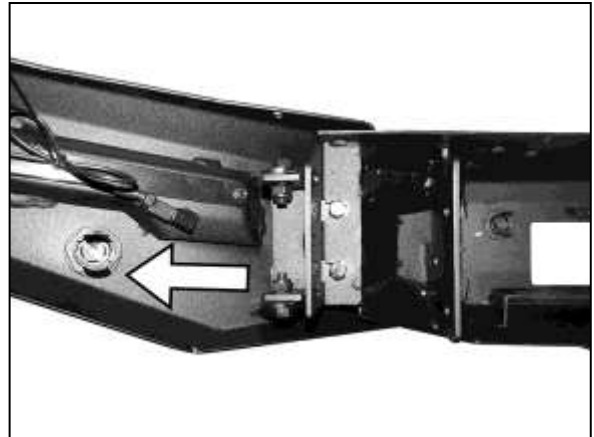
Reuse factory bumper bolts to attach Frame Brackets to end of frame
